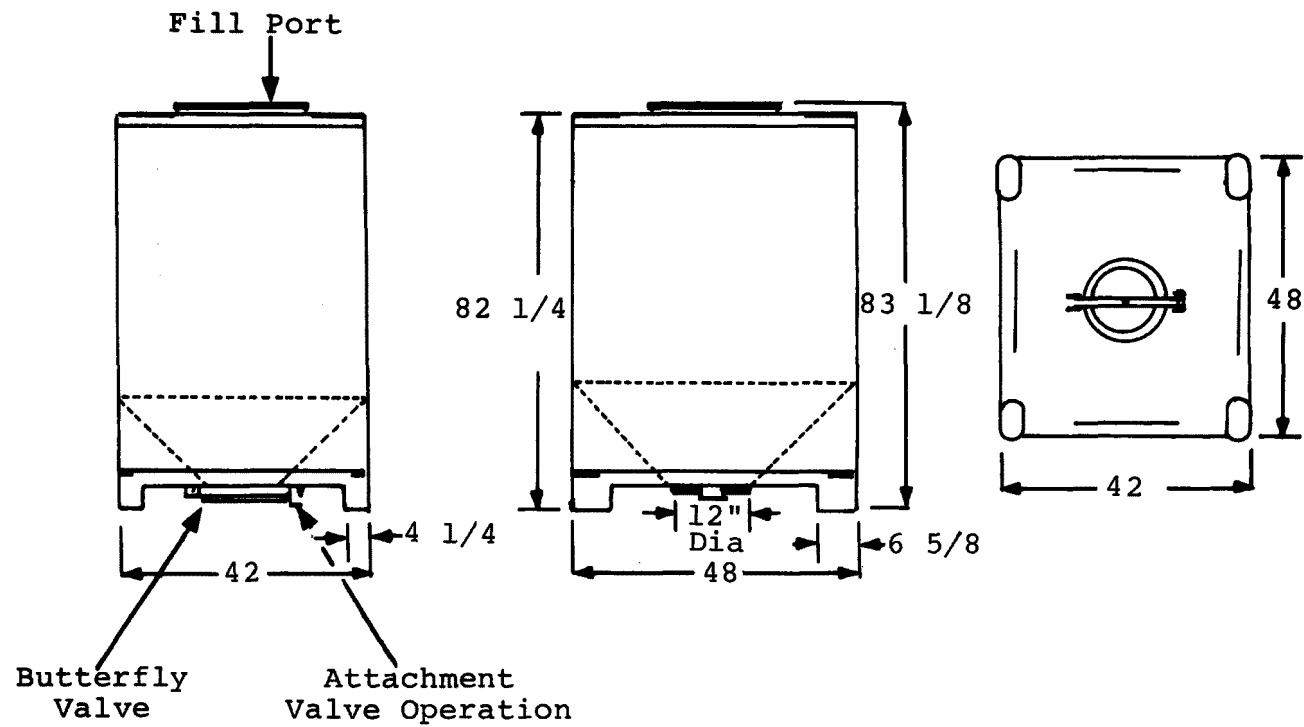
Layout and dimensions of tote bin. (dimensions in inches)
